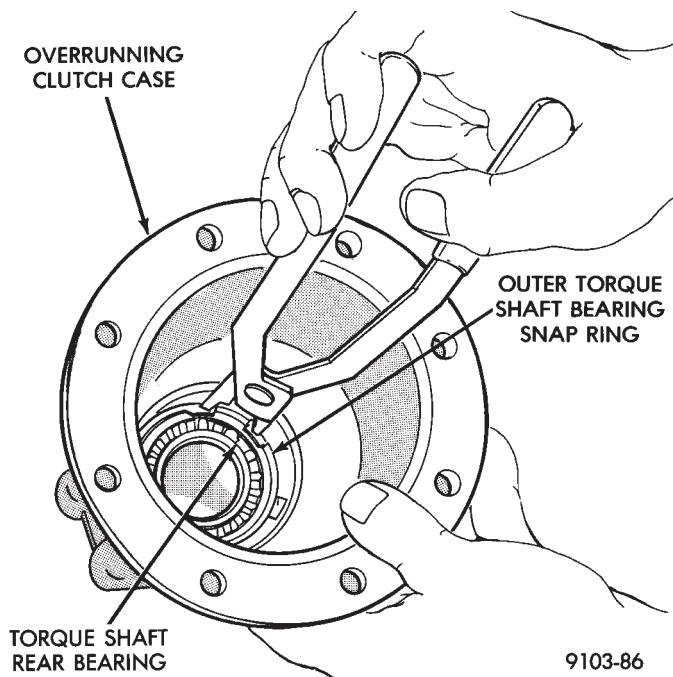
Torque Shaft Rear Bearing Snap Ring
